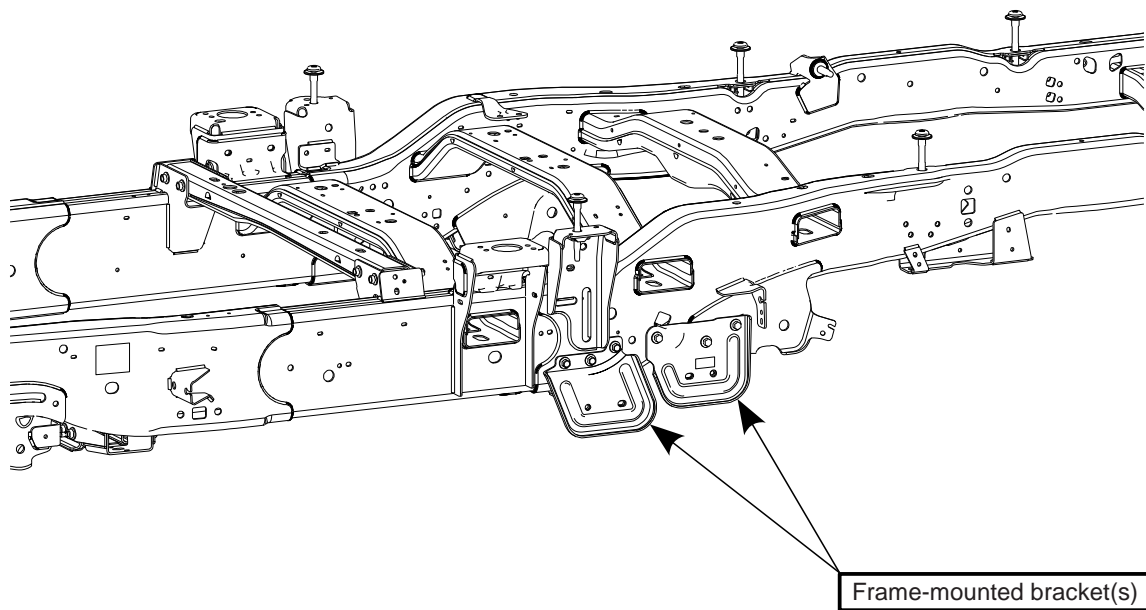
FIGURE C – LH FRAME-MOUNTED BRACKET(S) REQUIRED ON NON-SERVICE APPLICATION SECOND UNIT BODY (SUB) INSTALLATIONS (E.G., STAKE, PLATFORM, ETC.) (PICKUP BOX DELETE ONLY)
